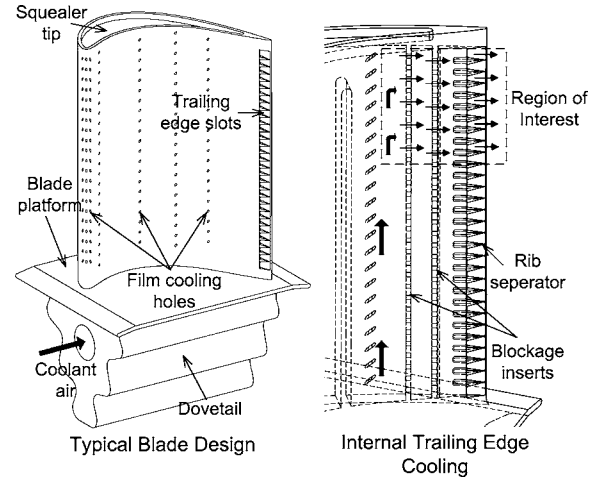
Schematic drawing of a typical turbine blade with a cutback TE and impingement blockage inserts
